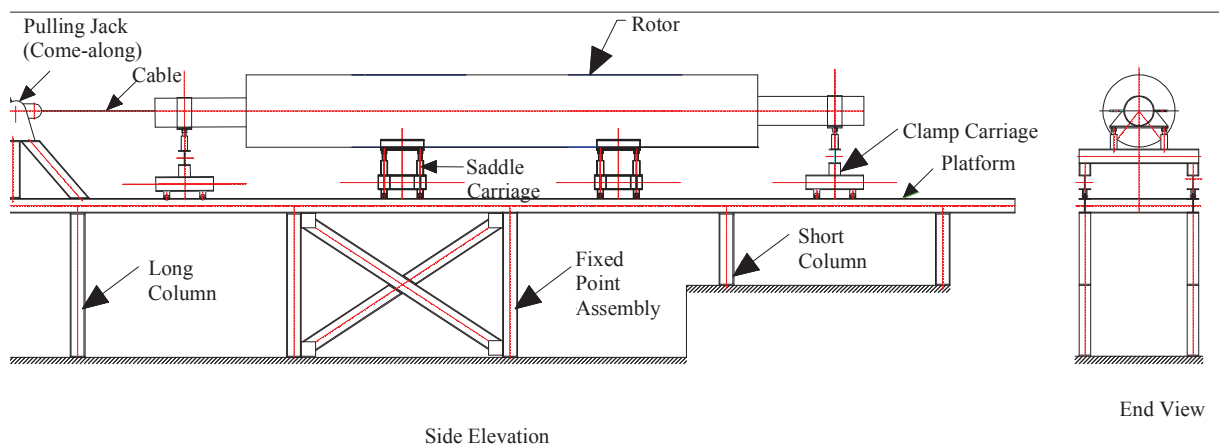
Conceptual design of the sleeve rotor puller mechanism.
